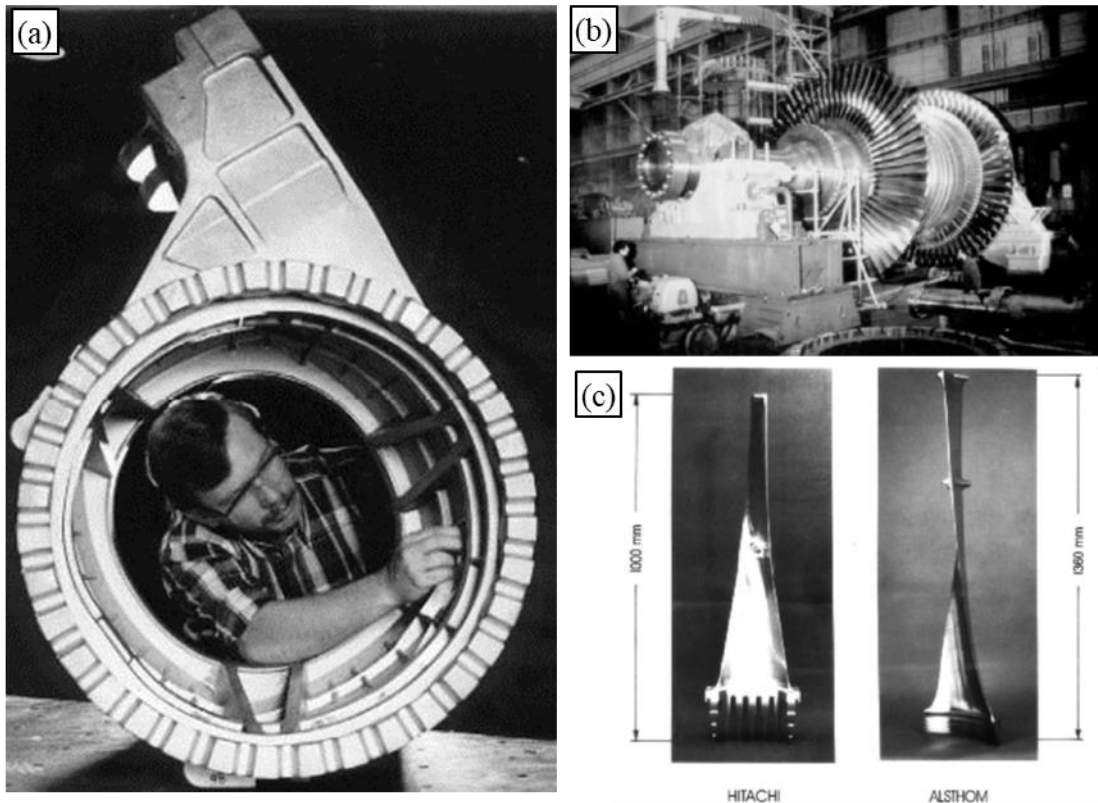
Applications of Ti-6Al-4V: (a) casting of a Bell Helicopter transmission adapter case; (b) large steam turbine rotor; (c) Large steam turbine blades [2]
